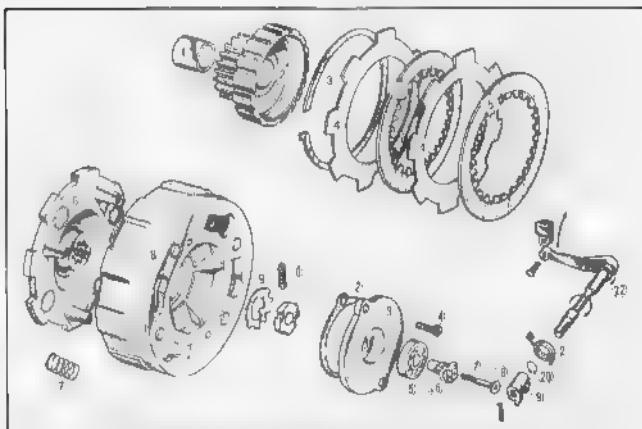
Component parts of clutch, IS 90, CL 90, CL 90 L, CD 90
